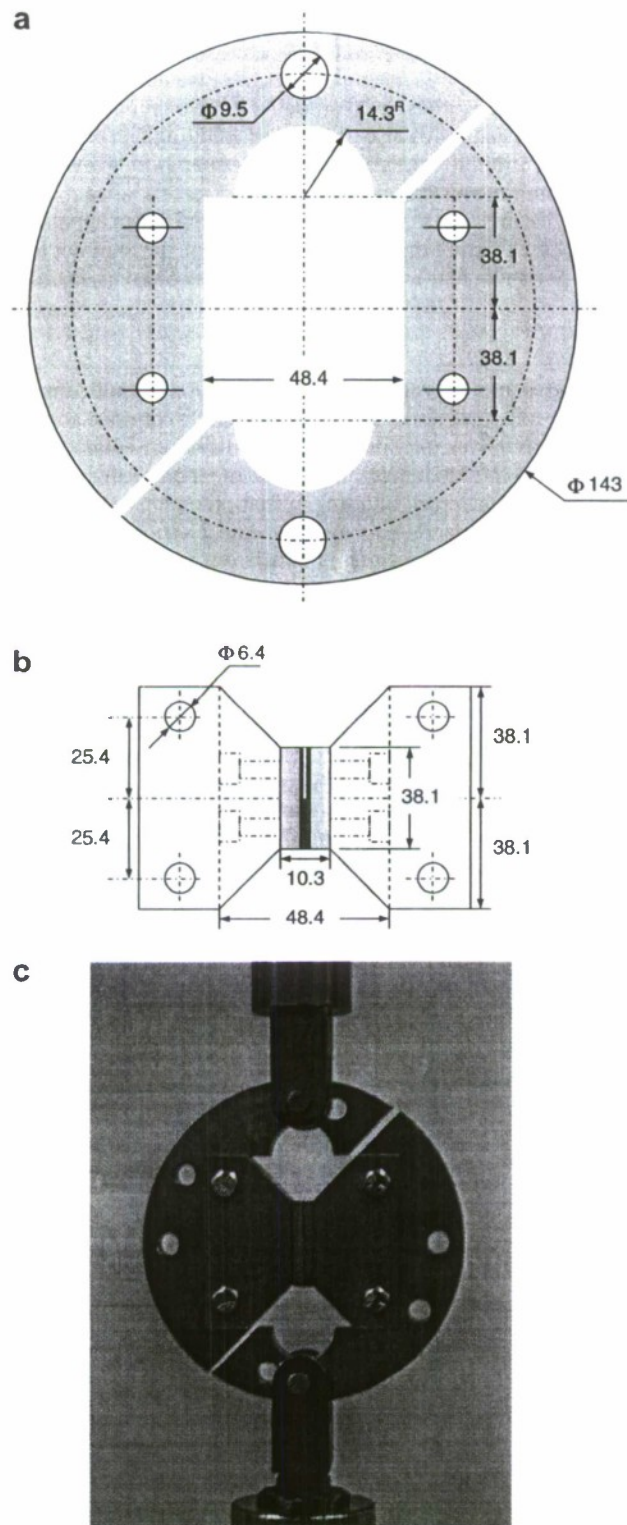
The grips and specimen for the modified Arcan test for shear fracture, including (a) the circular grips, (b) the couplings with specimen attached, and (c) an optical image of the entire setup. All dimensions are in millimeters.
